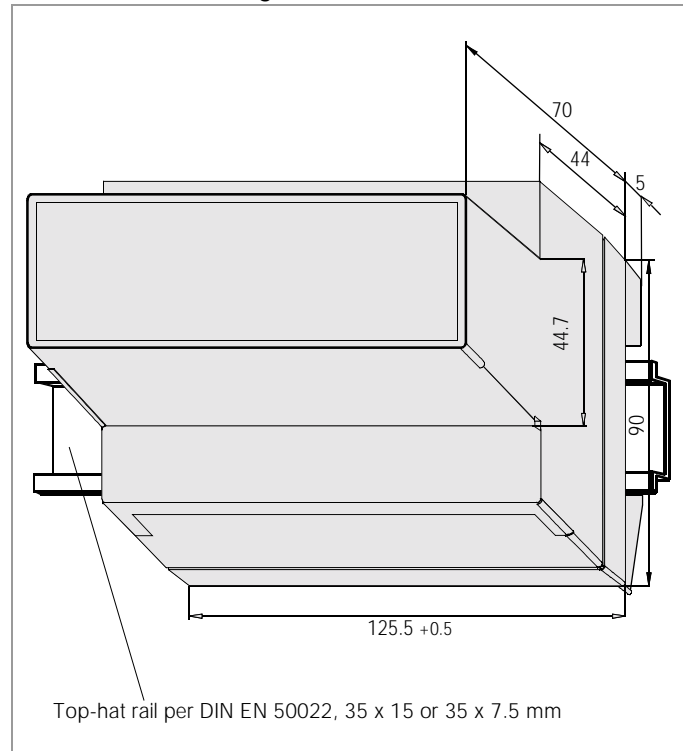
Dimensional Drawing for Top-Hat Rail Mounting (front and side view)
